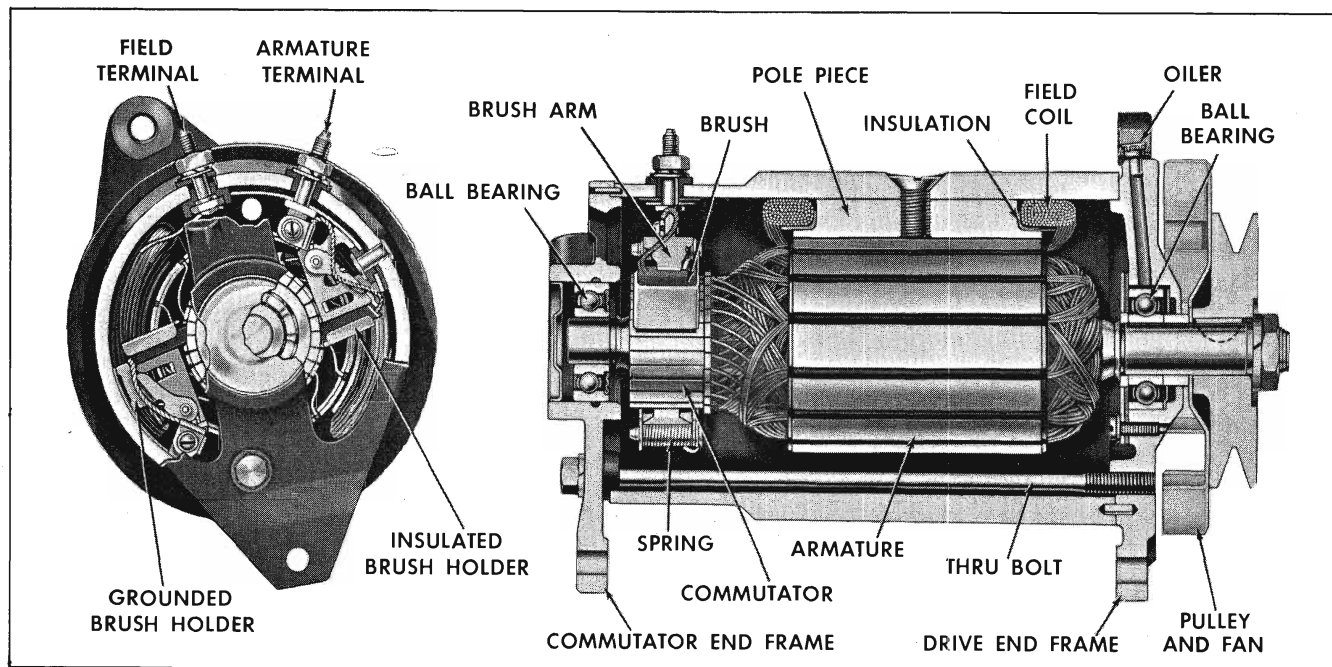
Cross Section of Standard Generator Assembly (35 amp)
